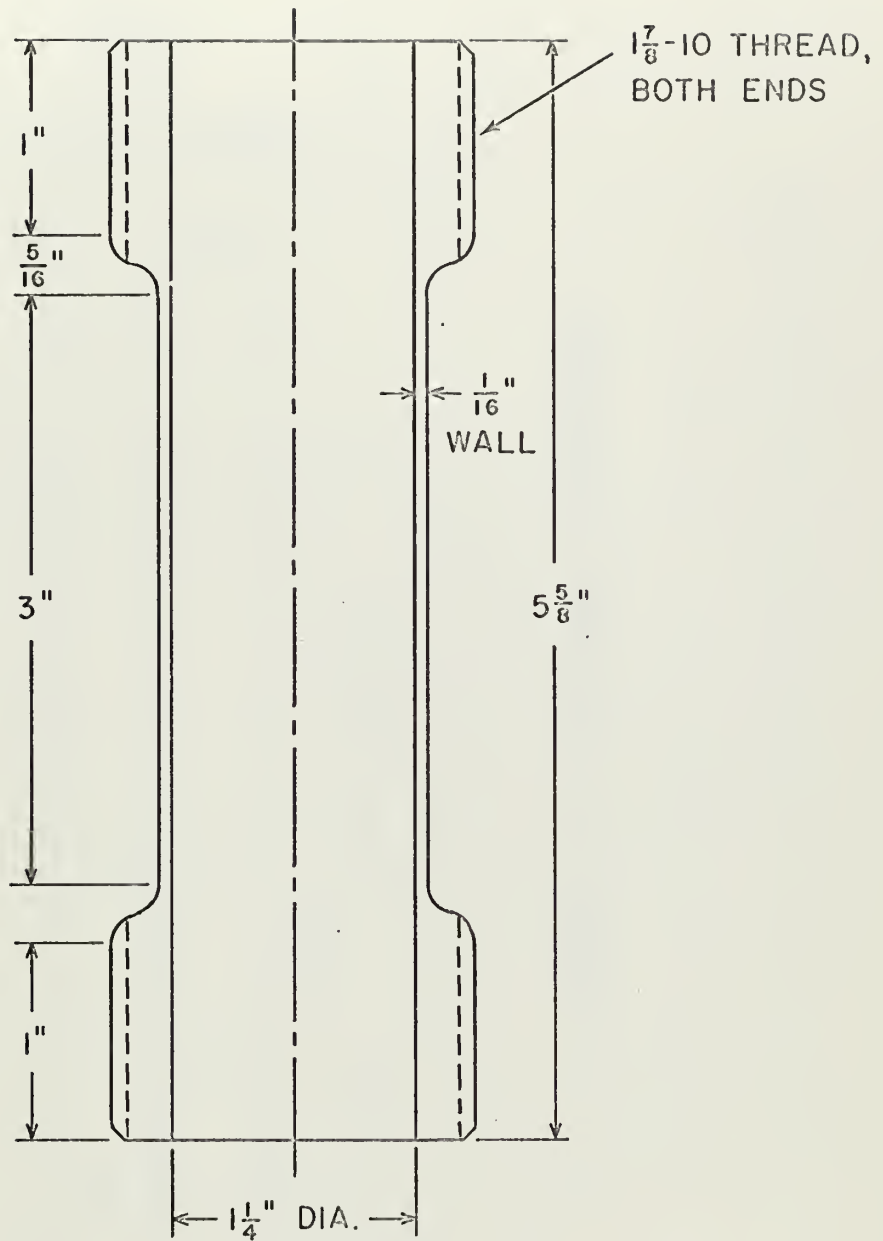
BIAXIAL SPECIMEN CROSS SECTION.
